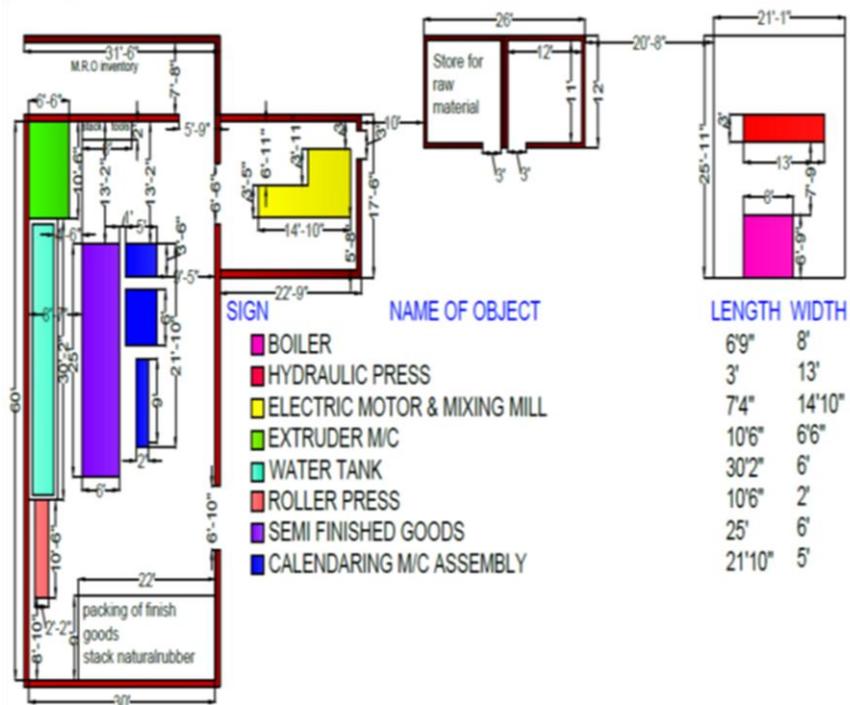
Existing Plant Layout of C.R.P at G.I.D.C
